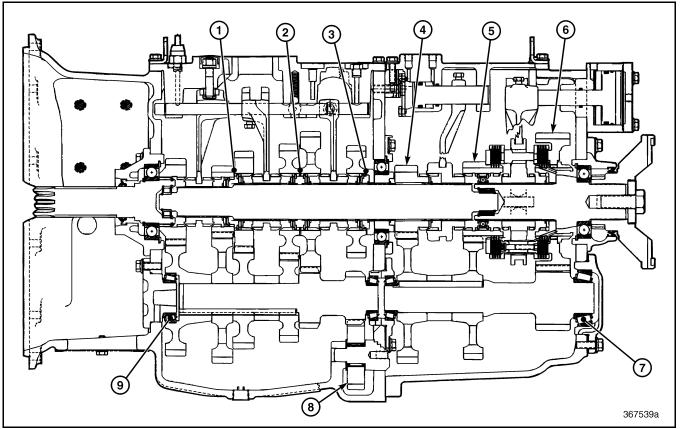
Gear End Play and Bearing Preload (T313L/T318L Shown)
